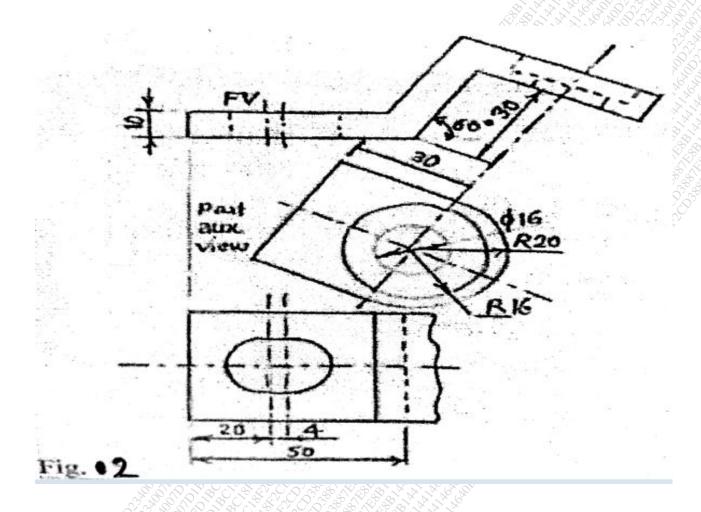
show front view incomplete top view and partial auxiliary view of an object draw the followings view
